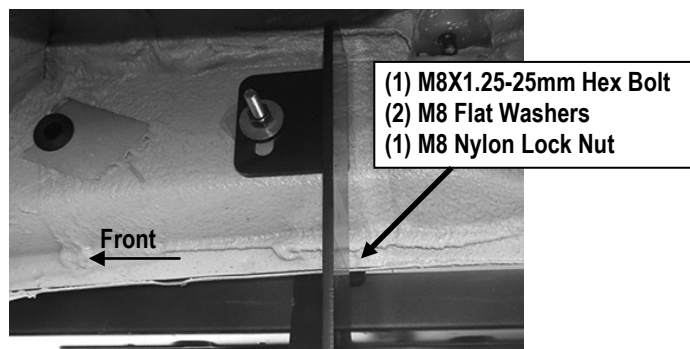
Passenger Side 2nd & 3rd & 4th Mounting Locations
